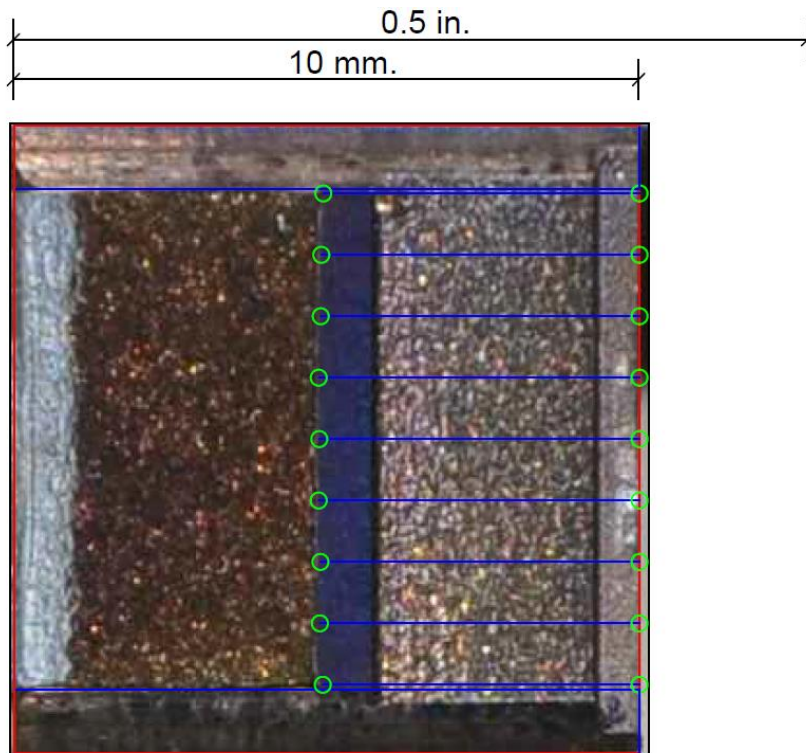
Specimen D25' Fracture Surface
